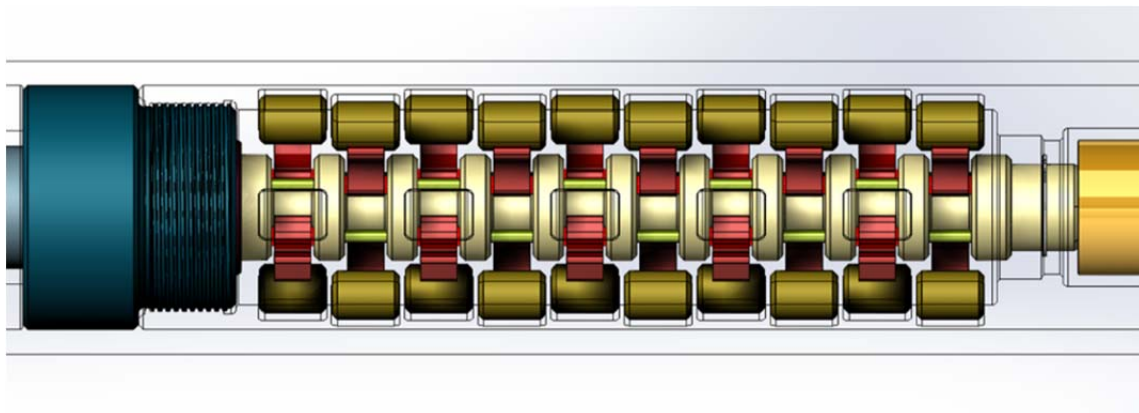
Detailed view of the hammer assembly. Hammers (red) are rotated by the smaller inside shaft so they strike the anvils (olive) welded into the larger outer rod.
